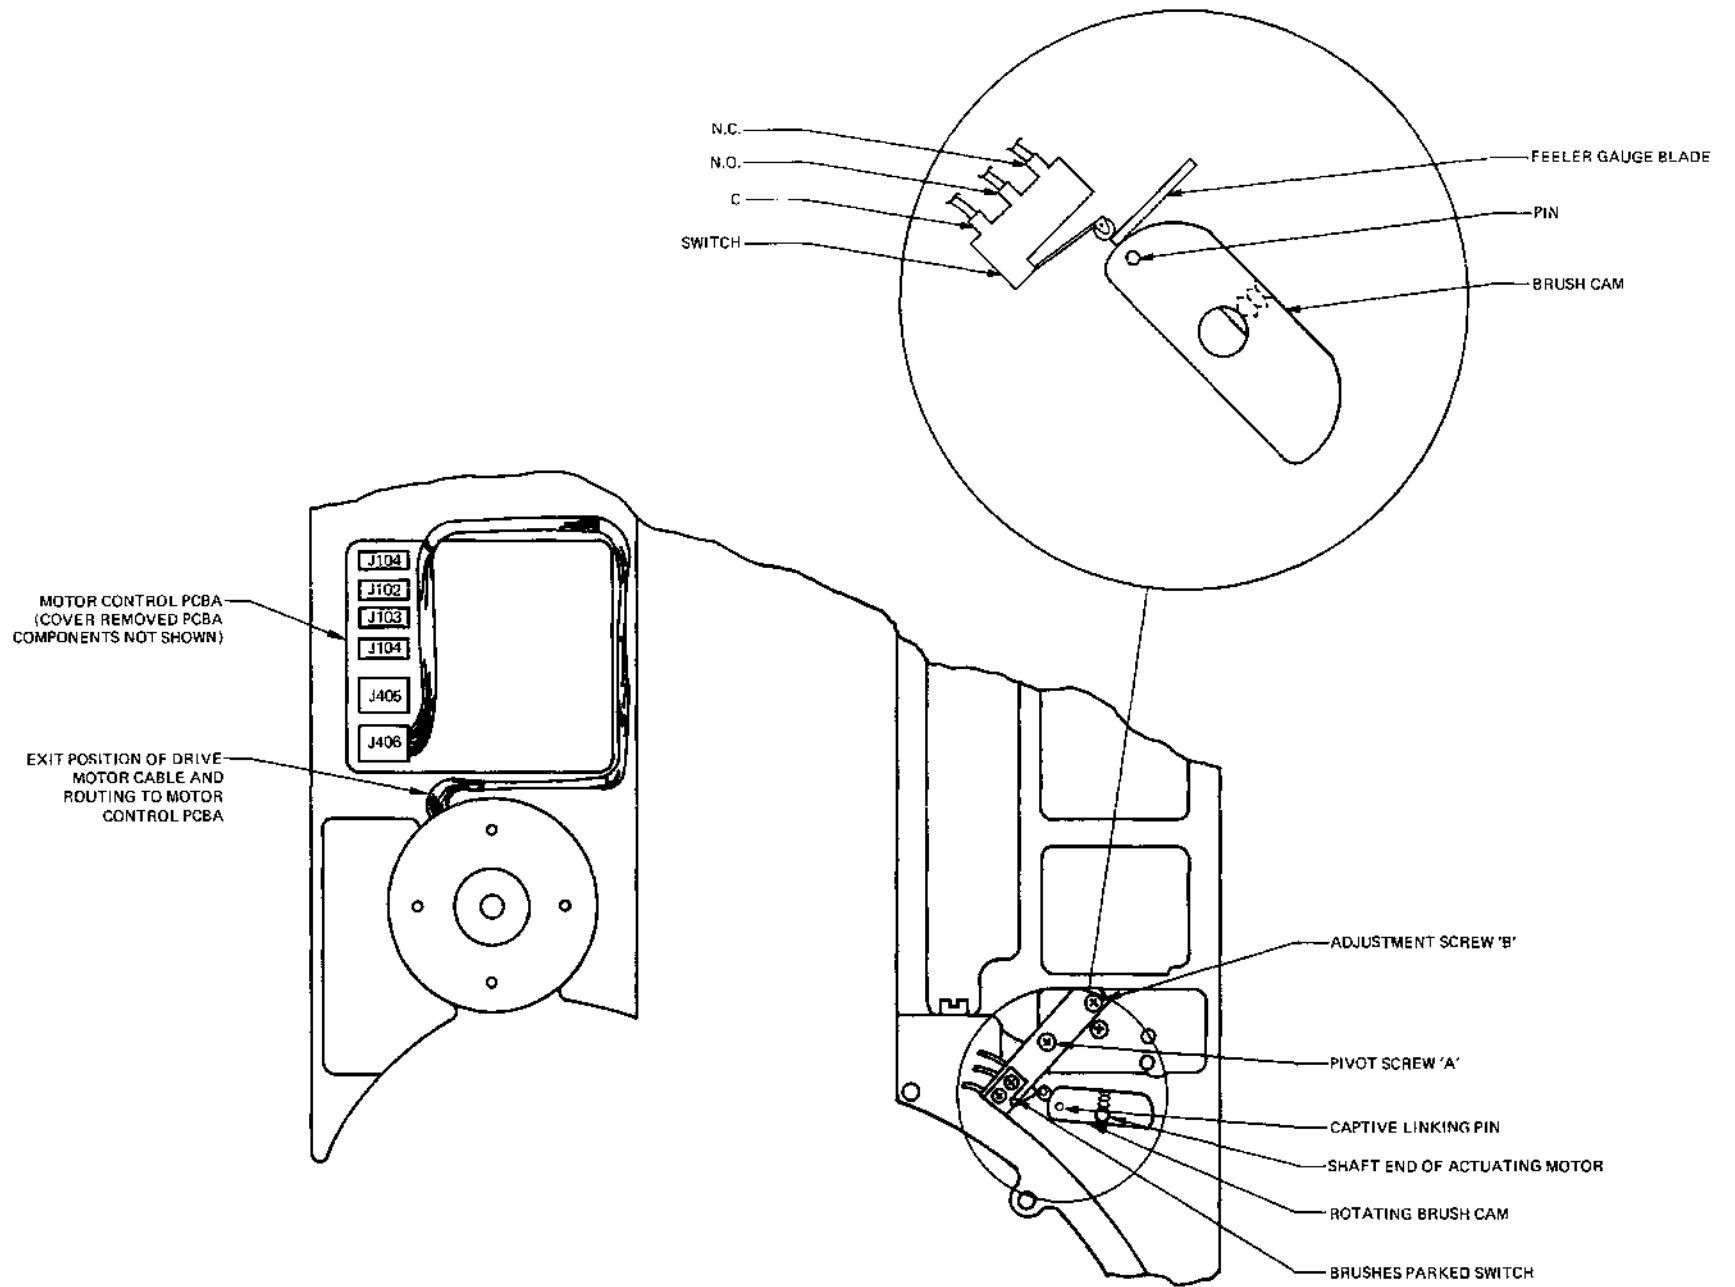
Brush Cam Installation and Drive Motor Cable Routing
